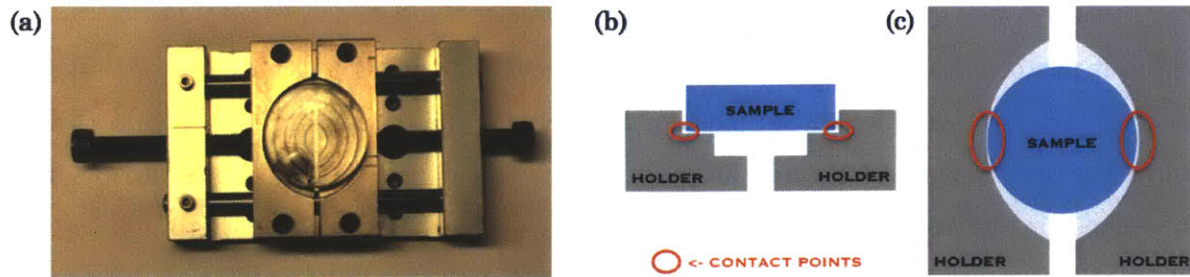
(a) Disk shaped fused silica sample fixed with the circular jaws. Schematic (b) side view and (c) top view of the holder with identification of the two contact points. Rotation of the sample was possible around the axis crossing these contact points.
